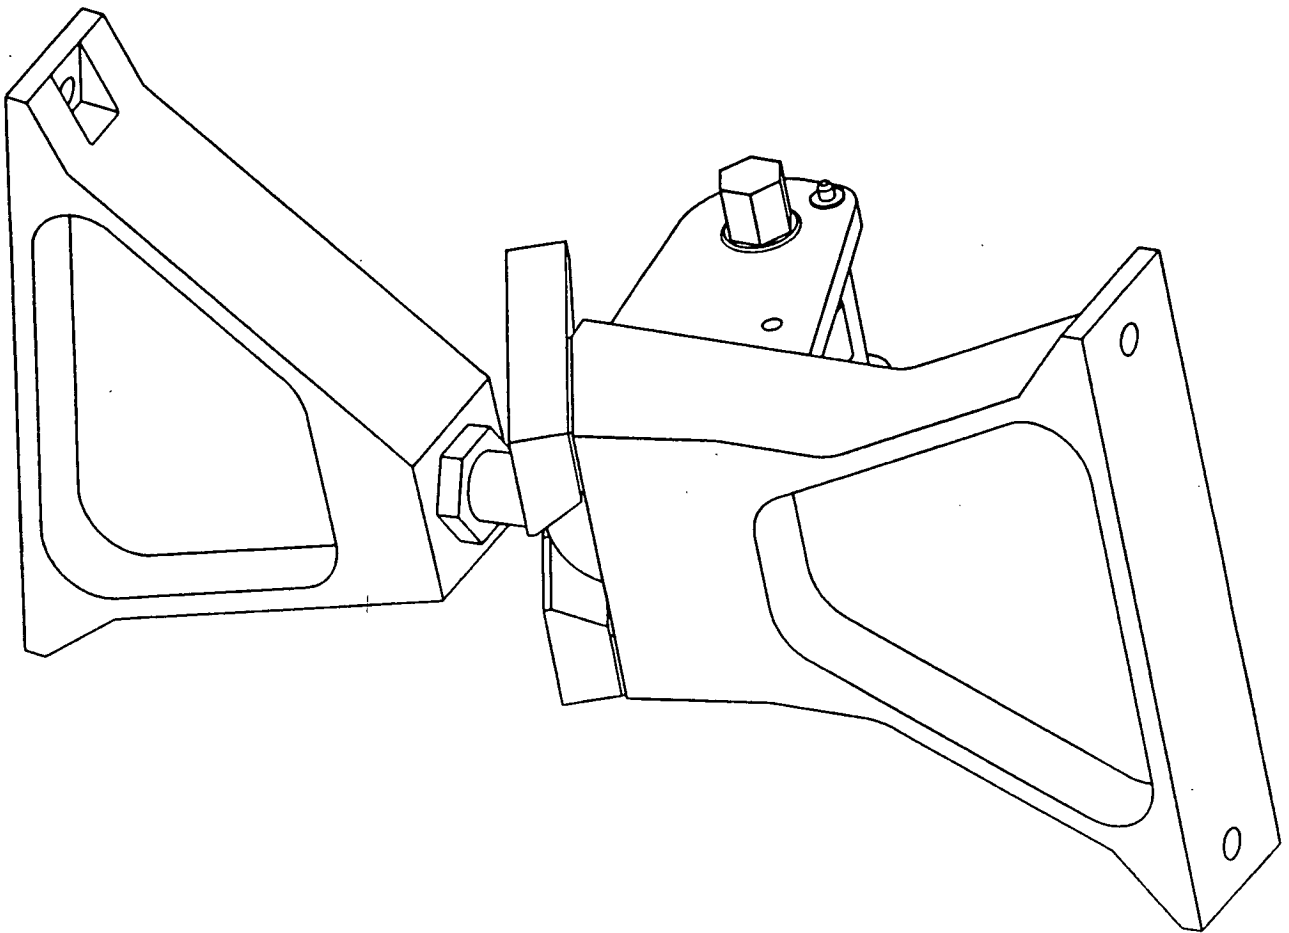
Isometric View Of The Type II Latch and Striker
